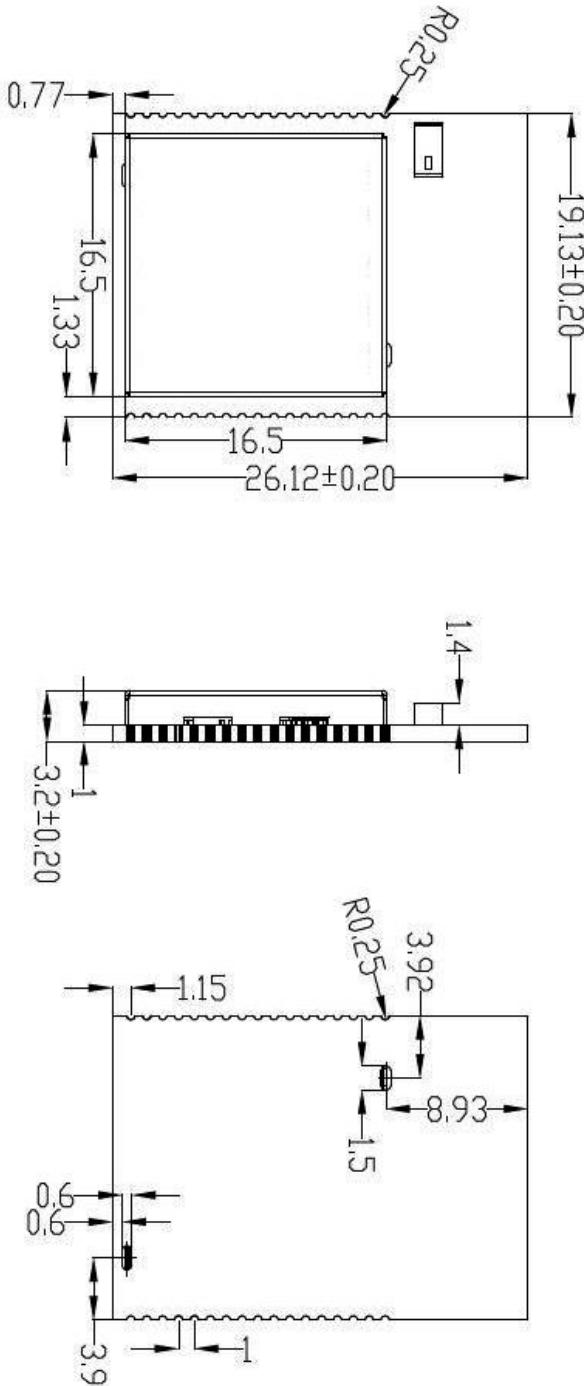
SKU609 PCB Footprint and Dimensions(units: mm)
